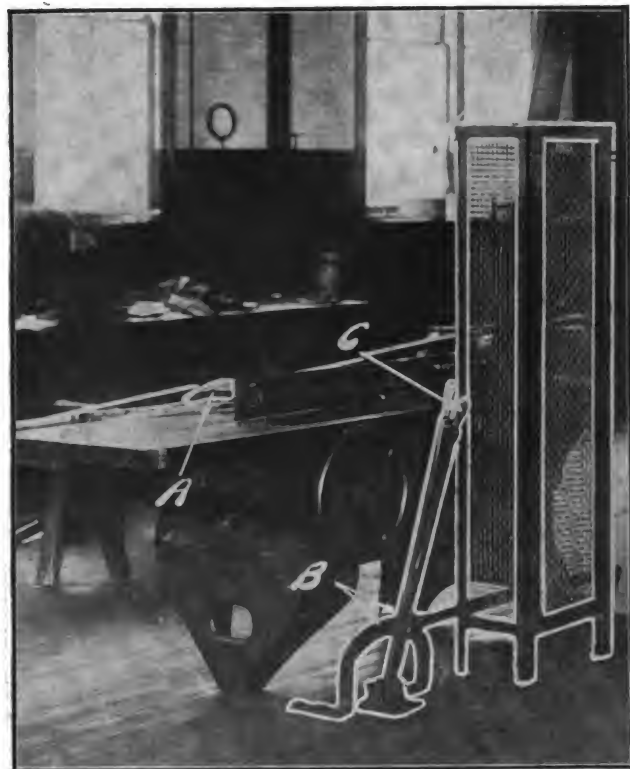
Shows a jointer with a Champion guard at A. Note should also be taken of the angle iron and wire mesh belt guard and locking belt shifter, which eliminates all possibility of the machine being accidentally started while the operator is adjusting the knives. Before belt can be shifted it is necessary to raise latch at B by means of lever C.
